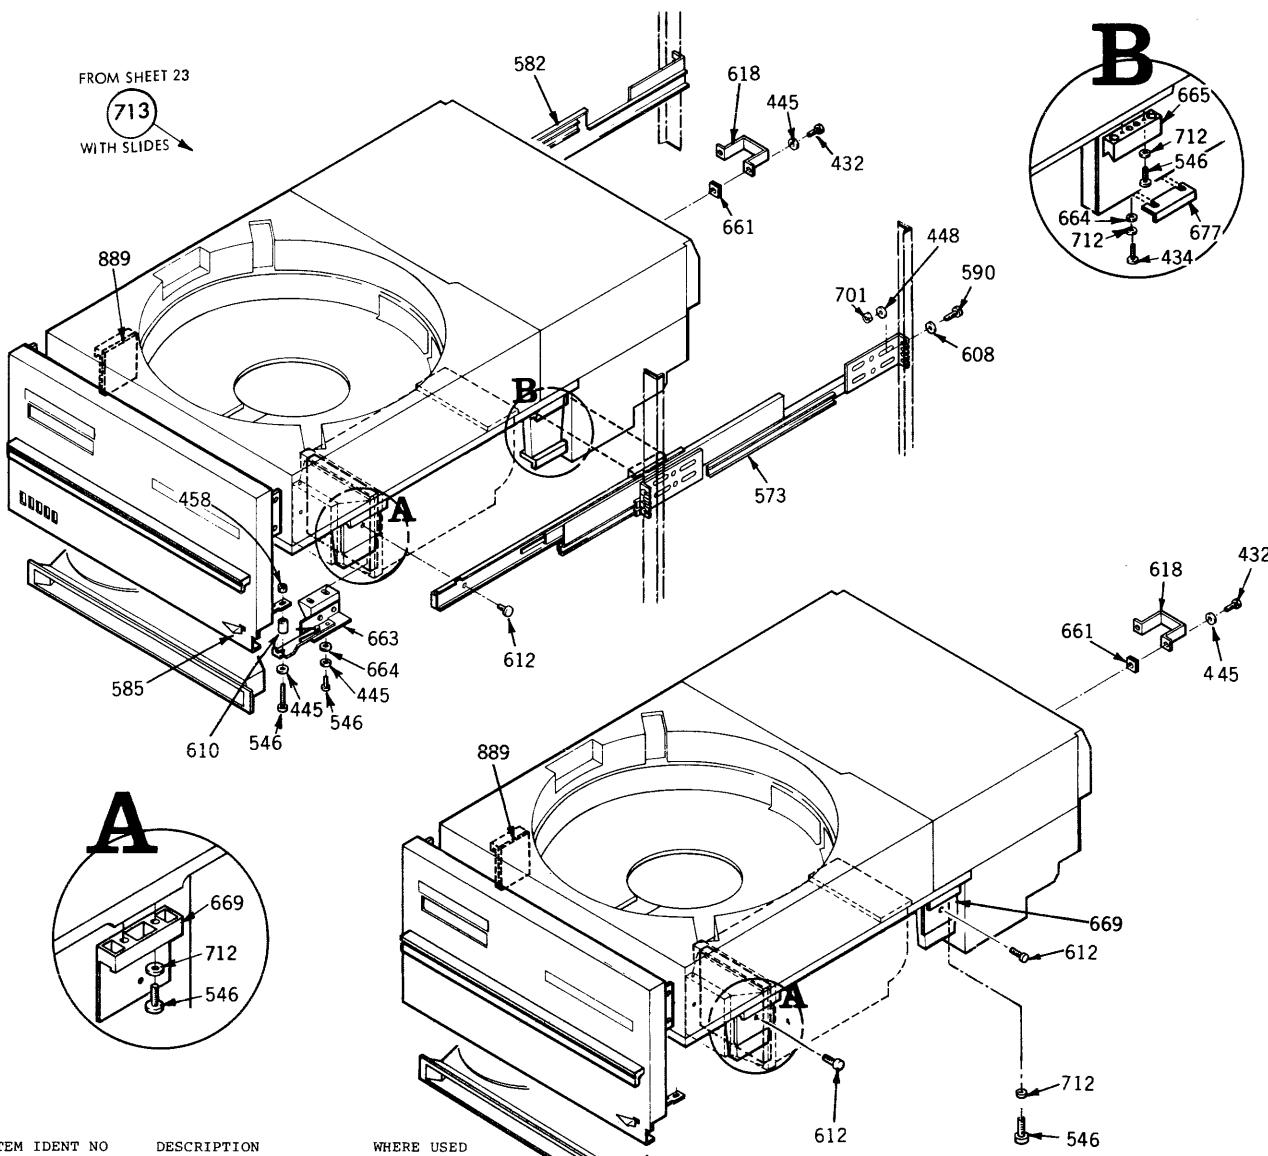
RACK MOUNT ASSEMBLY (SHEET 2 OF 3)
